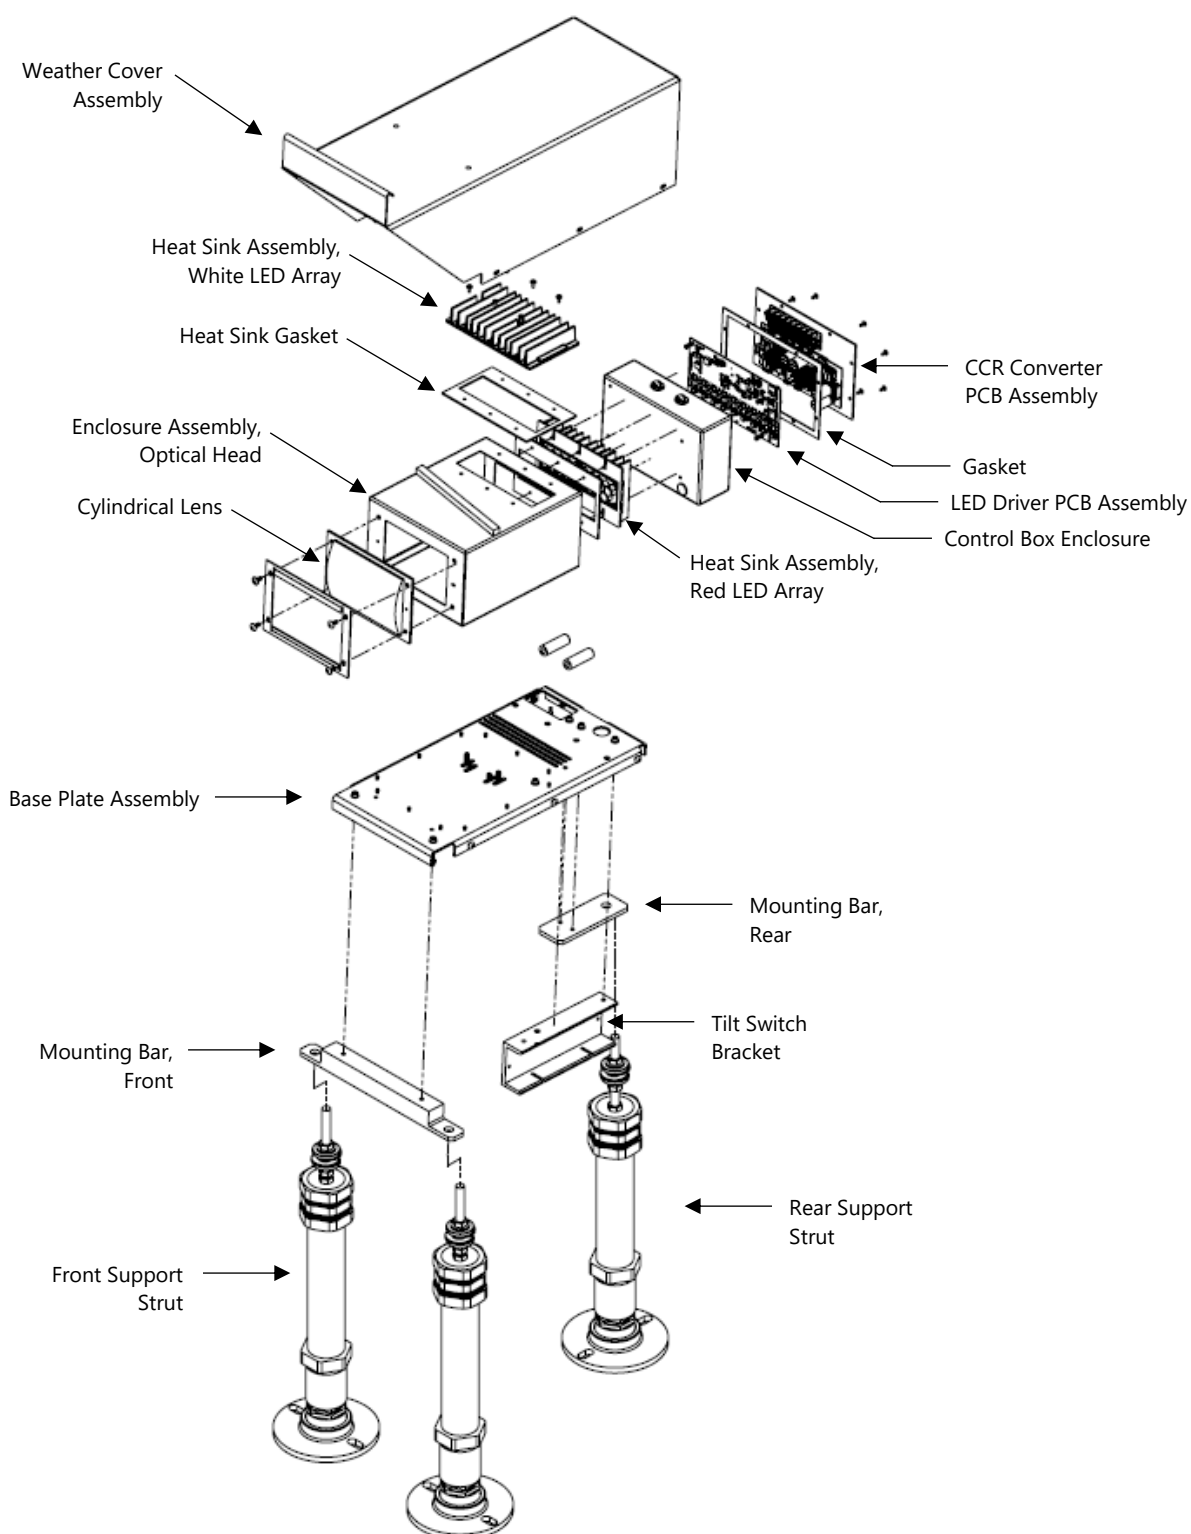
Exploded View of Light Head Assembly and Mounting Stand
